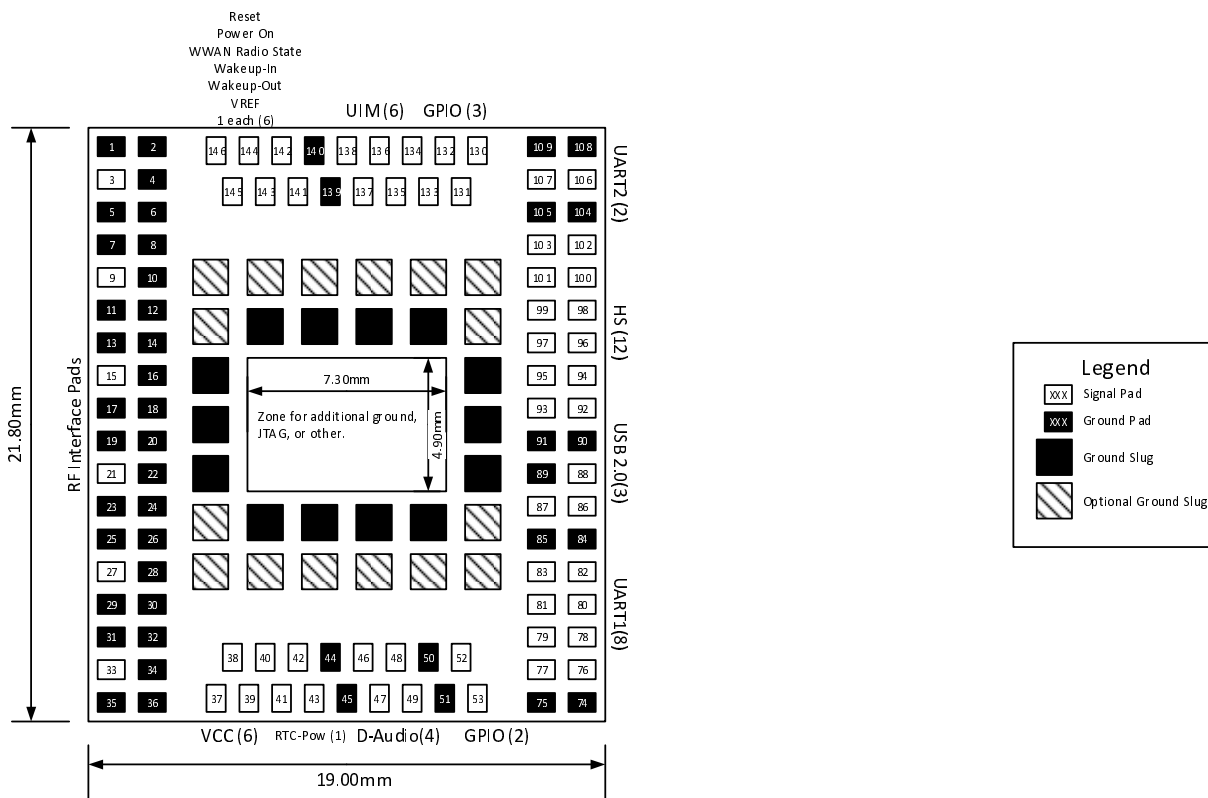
SMT1922 black and white physical form factor (414 mm<sup>2</sup>), dimensions, pad numbering and placement
